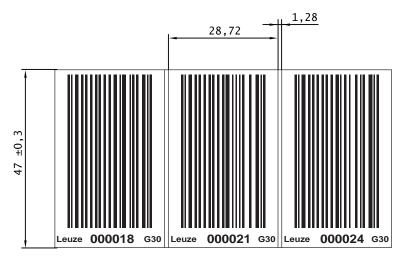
Dimensioned drawing BCB G30 ... bar code tape with 30 mm grid
